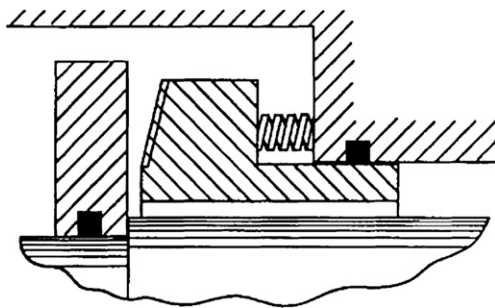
• Typical design for curved face — spiral groove non-contact seal; curvature may alternately be on rotor (Courtesy of John Crane Co.)
